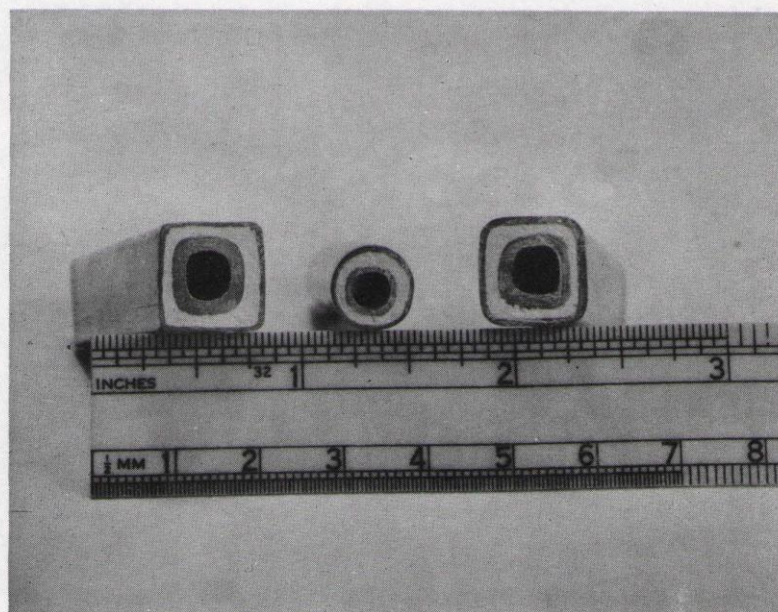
Photograph of conductors used in the trim coil assembly. (These specimens, taken from conductor ends, show rather irregular inners; the field errors introduced however are negligible).
